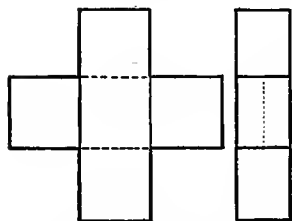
Mechanical Drawing of Middle Lap Joint
